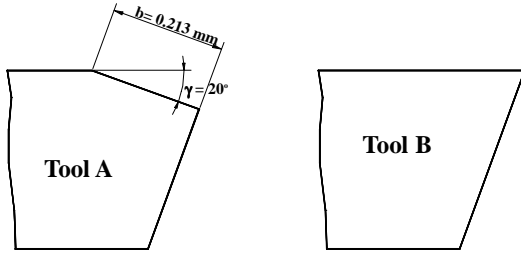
Edge geometry of chamfered (Tool A) and sharp edge (Tool B)
